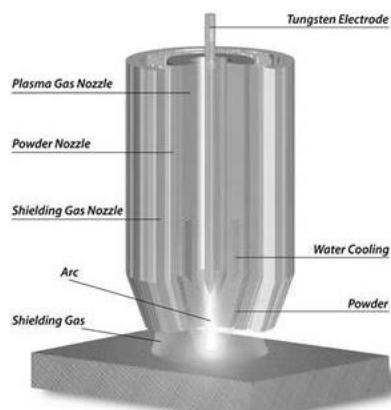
Schematic illustration of plasma transfer arc welding [104].
